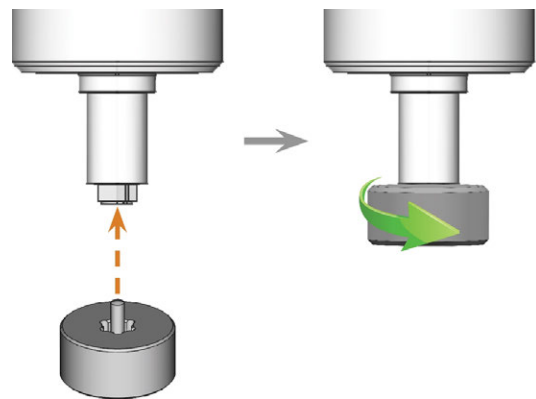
TIGHTENING THE COLLET CHUCK WITH THE KNURLED NUT; RECESS IN KNURLED NUT MARKED ORANGE
